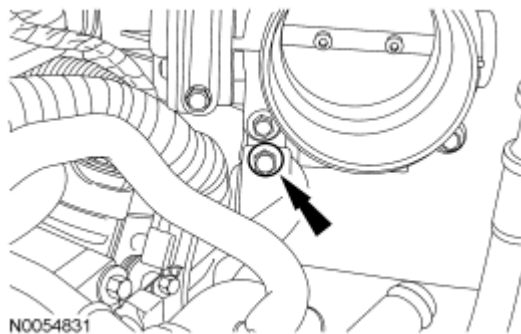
Locating Upper Intake Manifold Support Bracket Bolt
